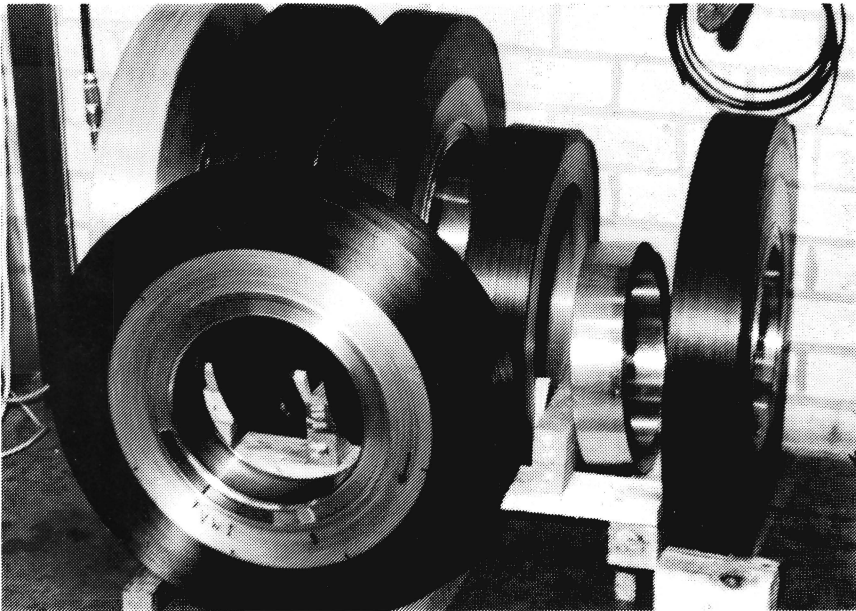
Layered disc flywheel of EMA FER prototype.
